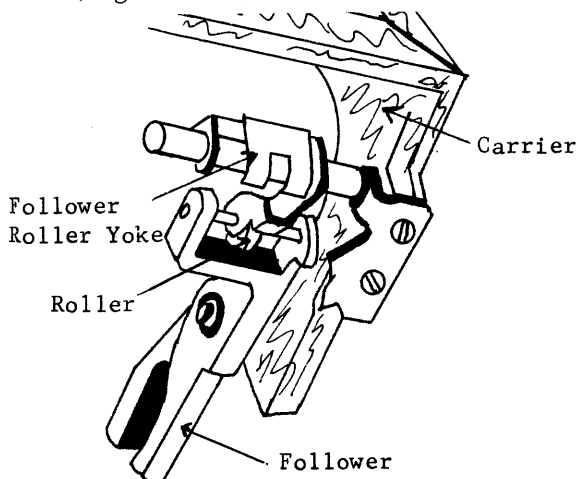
Print Cam Follower Roller Yoke Figure 1-90. Yoke Actuating Lever
